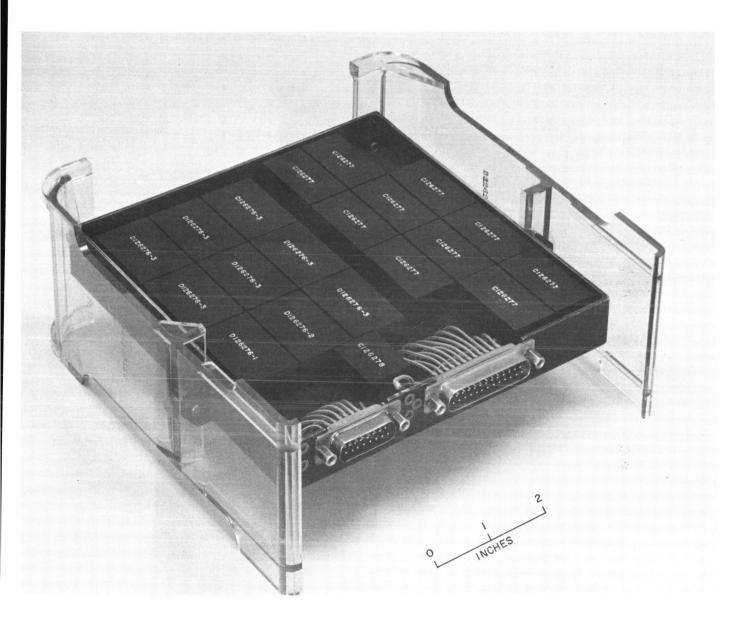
Welded prototype, PHA decoder subassembly (front)
